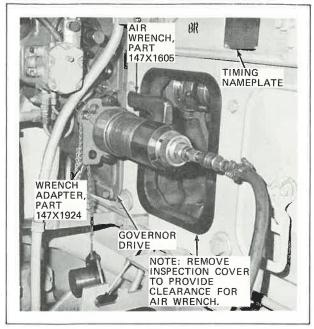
BARRING-OVER ENGINE USING THE PNEUTORQUE AIR WRENCH.
